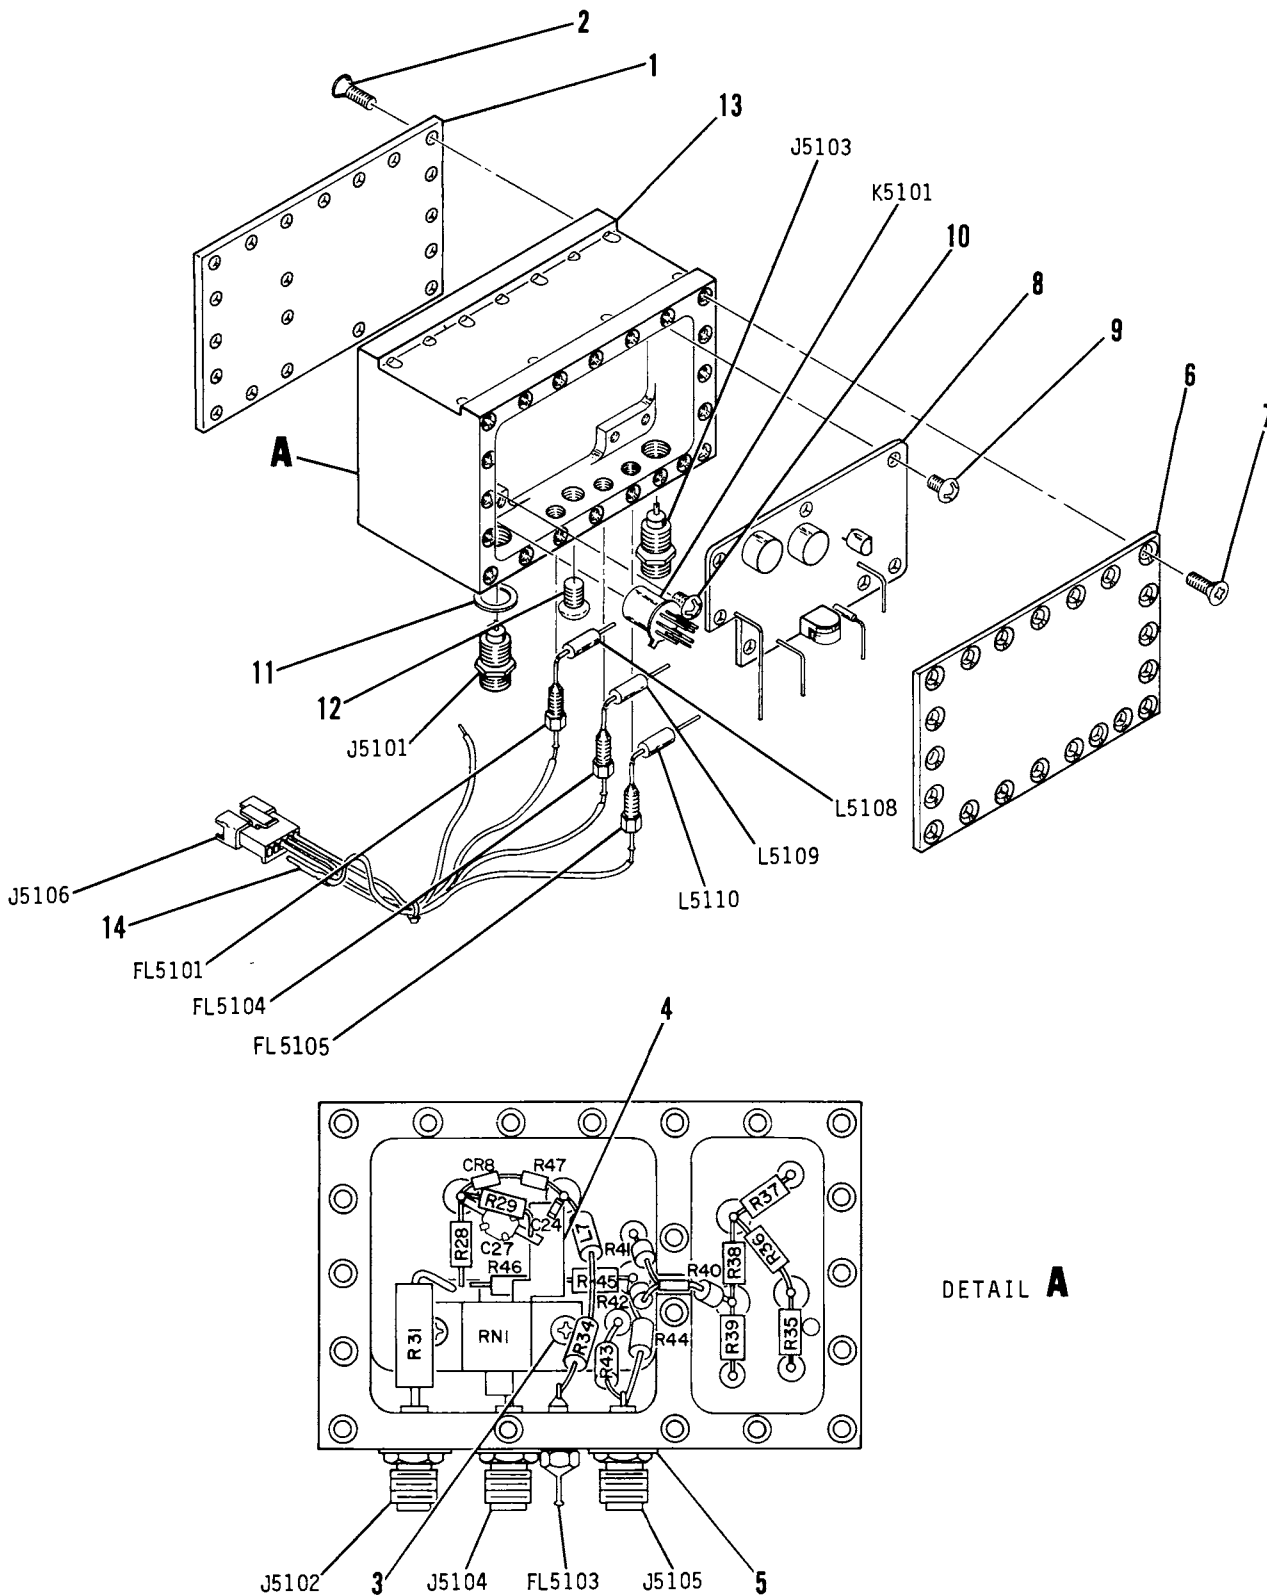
OUTPUT AMP ASSEMBLY
